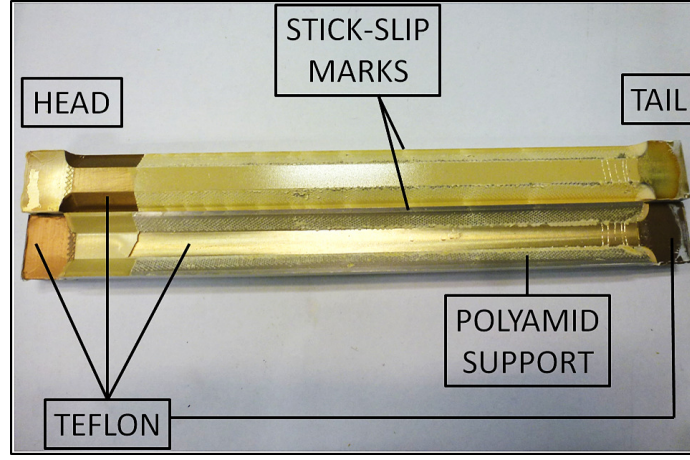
Rupture surfaces of a MMDCB specimen ($\alpha = 45^\circ$, $\dot{\delta} = 50\text{mm/min}$)
